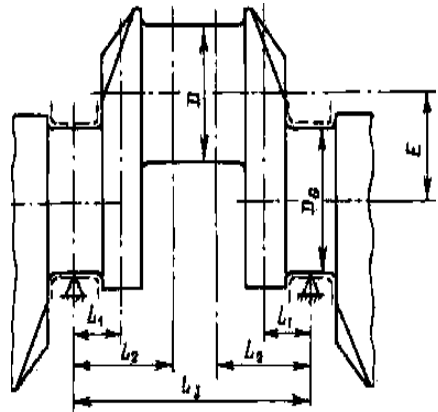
Crank throw for engine with 2 adjacent connecting rods
